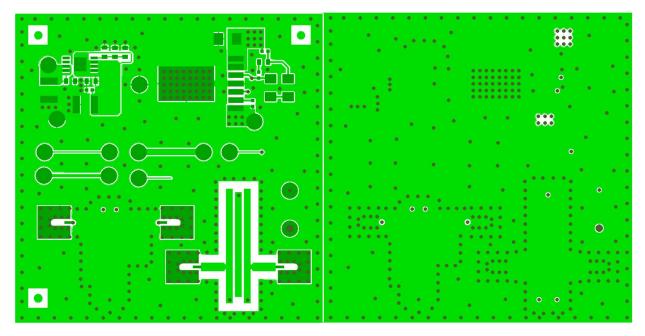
Figure 23: LH Layer 1 board 2; RH Layer 2 board 2
